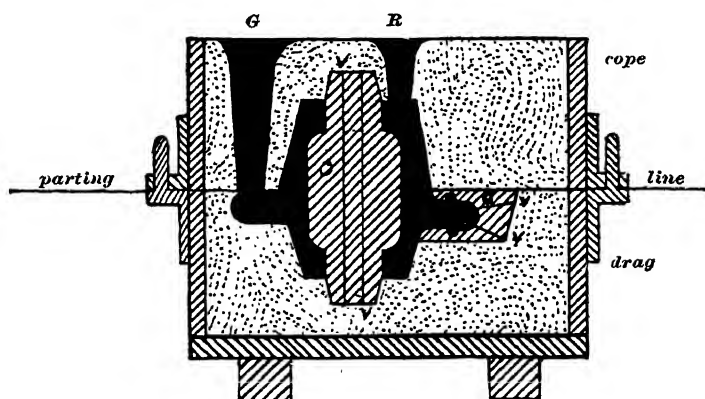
SECTION OF A FLASK, MOLD, CORES, ETC.
